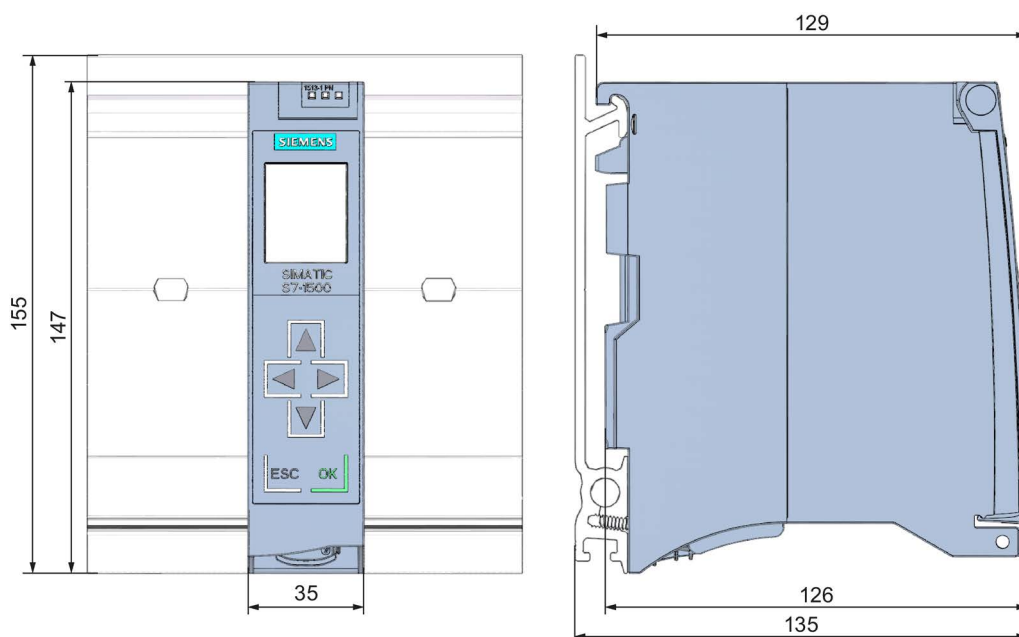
Dimensional drawing of CPU 1513-1 PN, front and side views
